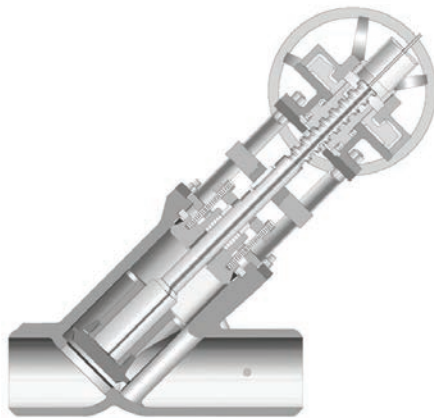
BY Globe, Butt Weld Ends
